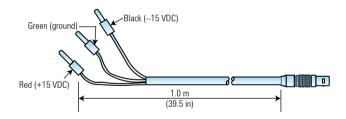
Mechanical dimension for cable option with banana plugs (87405C-101)
